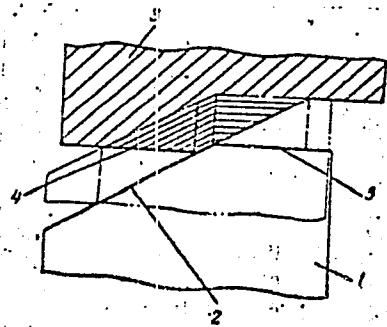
1 - tool bit; 2 - first cutting blade; 3 - product; 4 - zone of outer layer removal; 5 - second cutting blade
